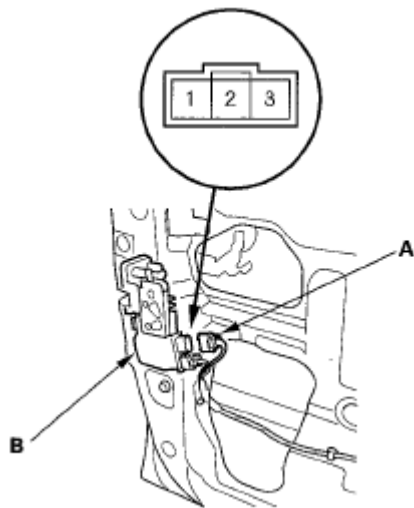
Identifying Driver's Door Lock Actuator 3P Connector Terminals
